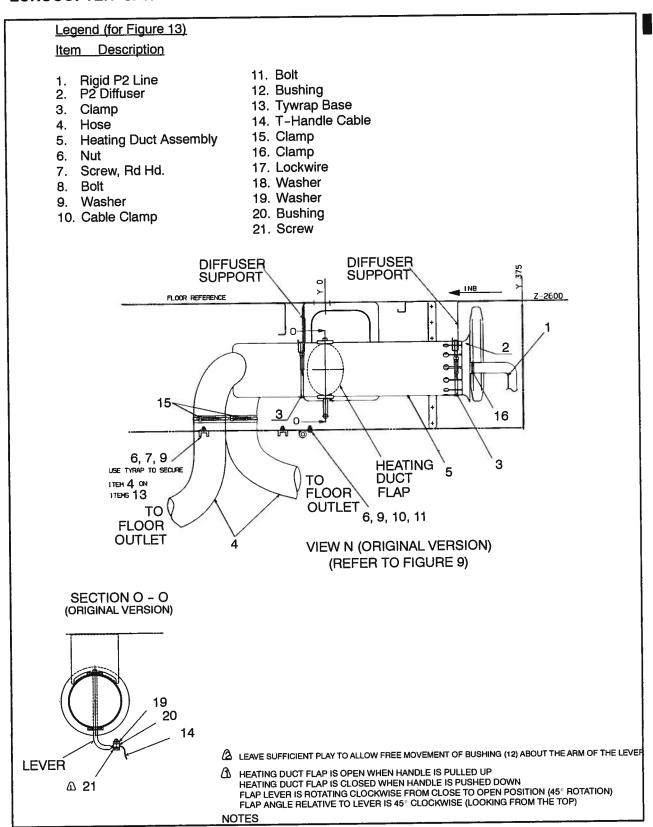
Heating Duct Assembly and Floor Outlet (Sheet 1 of 2)
